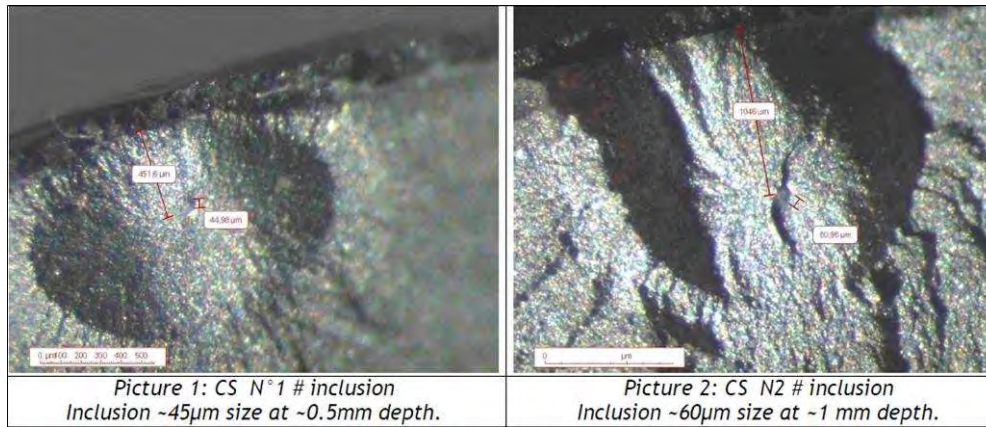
53SiVMo8Nb UFG spring – Surface fracture analysis.
